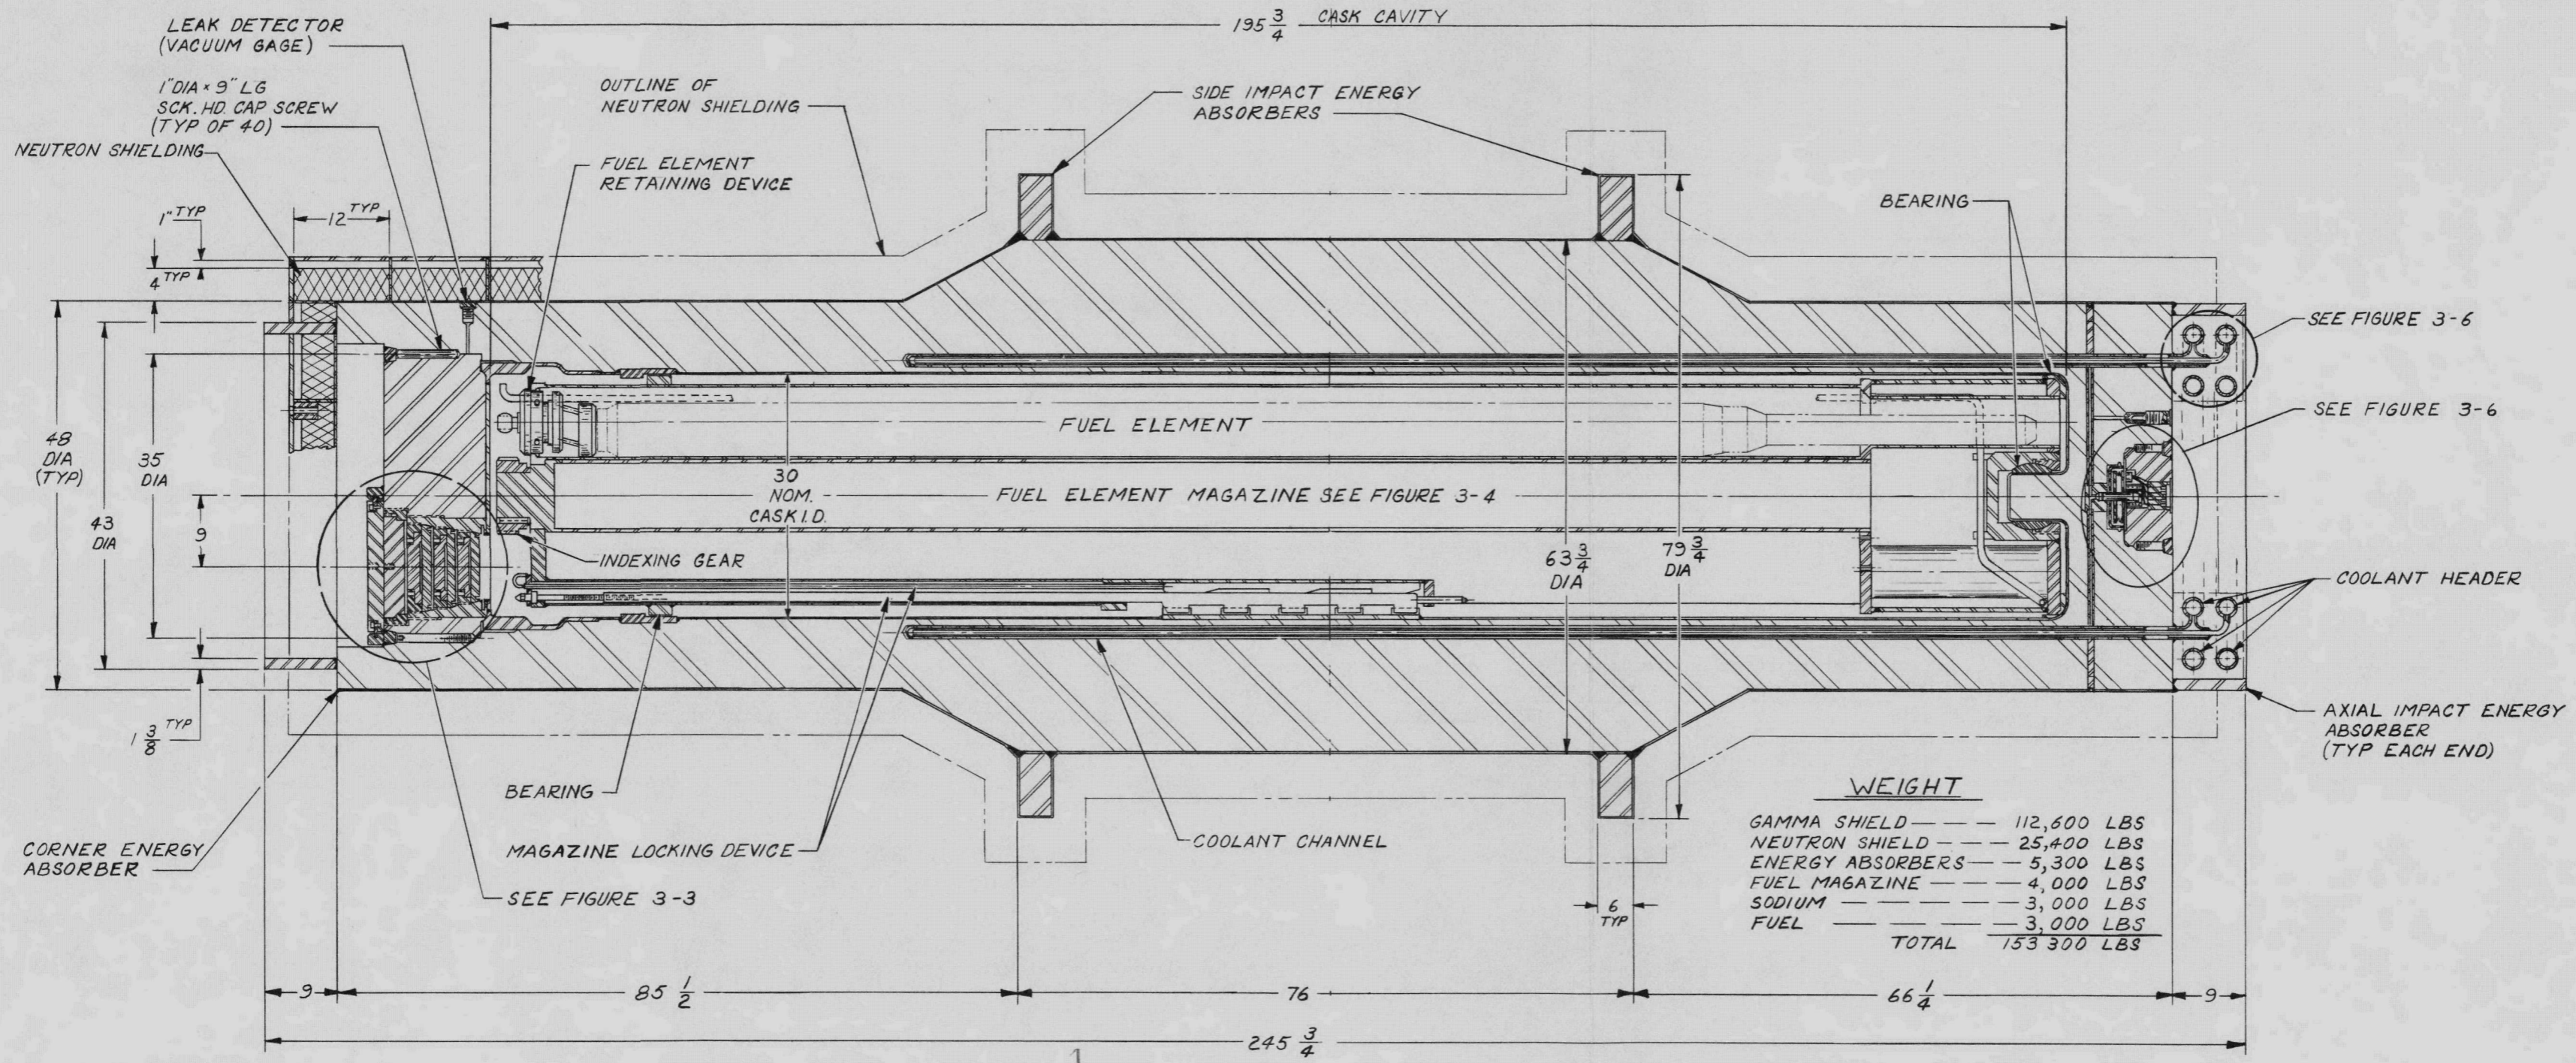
6-Subassembly Cask Sectional Elevation.
